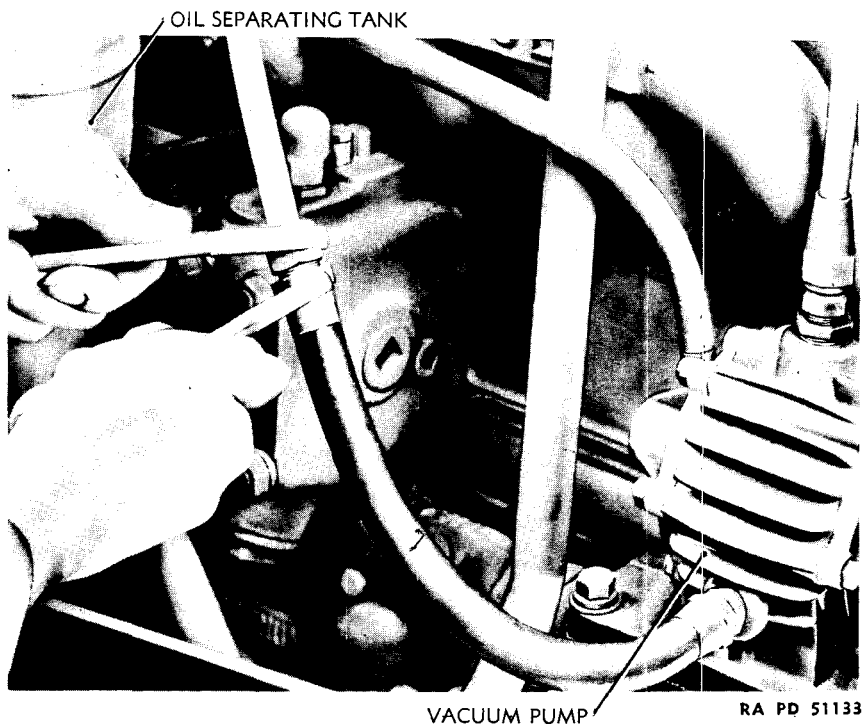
Disconnecting Line from Vacuum Pump to Oil Separating Tank - (Hercules Diesel)
